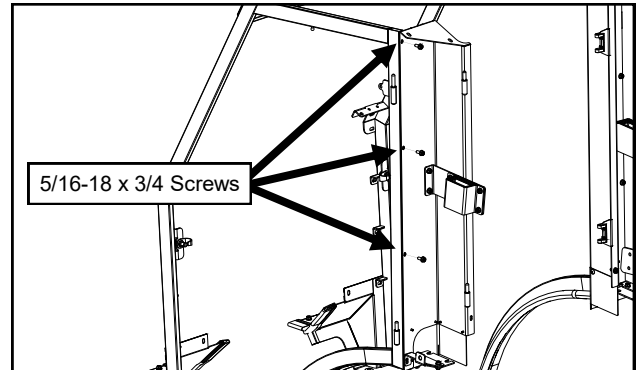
(Rear Leg to Side Frame Fasteners)
